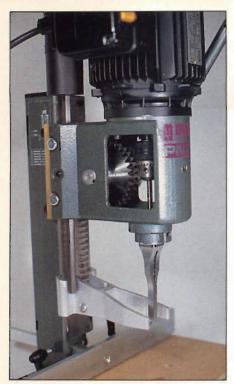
Photo B: A look inside the Multico shows the pinion gear used to move the head assembly on the column. Also note the Jacobs-type chuck used to hold and drive the drill bits.
